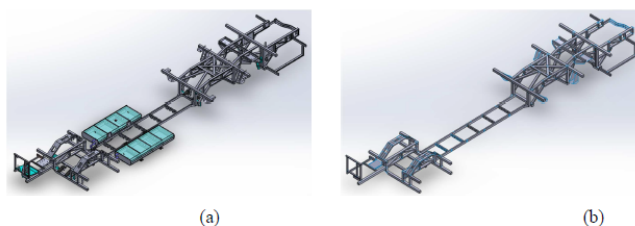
Chassis structure design: (a) old chassis, (b) new self-design chassis
